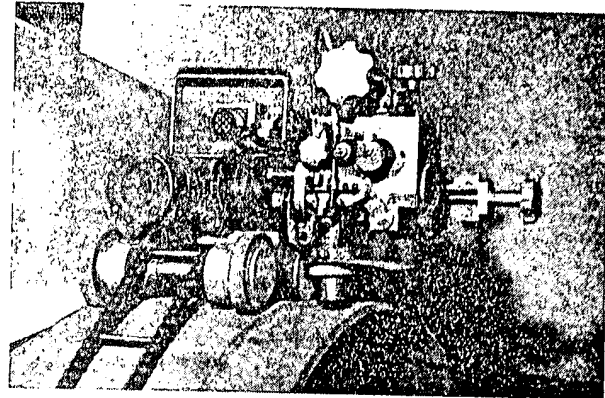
Automatic CO<sub>2</sub>-shielded arc welding machine for welding unrolled pipes
